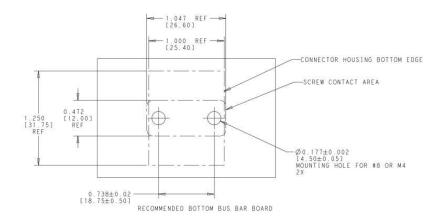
Bottom Screw-Mounting Bus Bar Board Layout View of P/N: 1643906-*.
